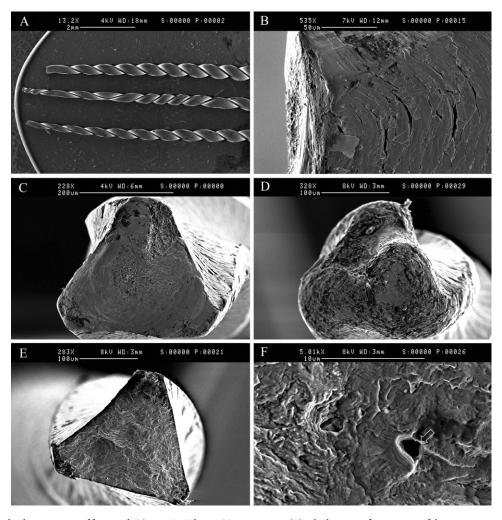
(*A*) Longitudinal examination of fractured .04 taper ProFile size 20 instruments. (*B*) A higher magnification view of the top specimen in A showing plastic deformation. (*C*) Fracture surface of *B* showing shear failure. (*D*) Fracture surface of the middle specimen with both twist and unwinding parts in *A* indicating shear failure. (*E*) Fracture surface of the bottom specimen in *A* showing fatigue failure. (*F*) A higher magnification view of *E* showing one crack initiation site located at a subsurface void (arrow).
